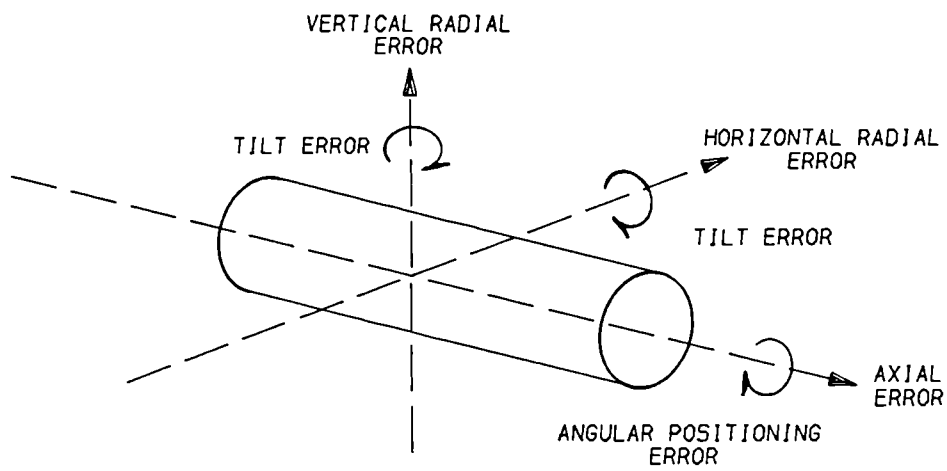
B THE SIX DEGREES OF FREEDOM OF A MACHINE TOOL SPINDLE
